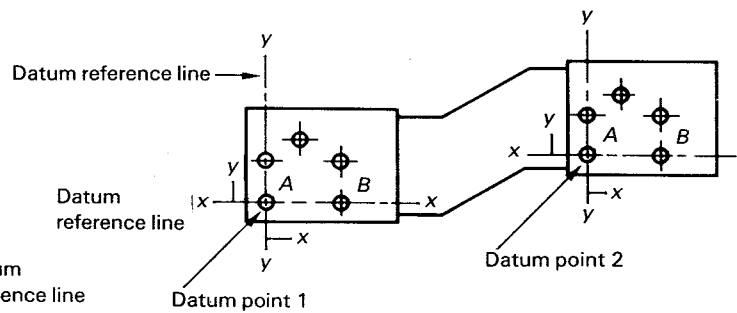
Multiple datum reference within rigid portion of flex-rigid printed board example
